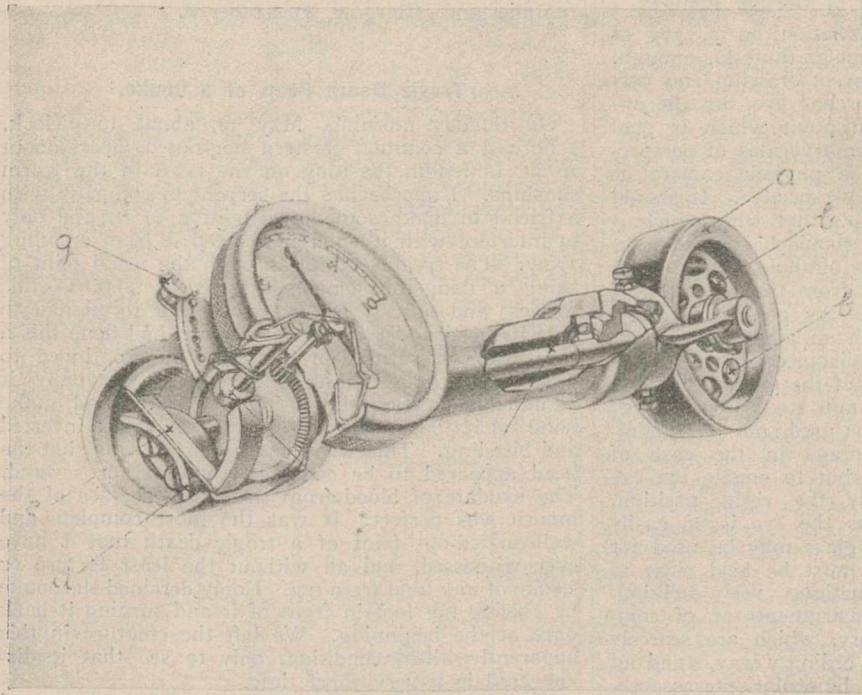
R.A.E. gyro turn indicator Mark V. *a*, gyro wheel; *b, b*, oblique holes for air-drive; *c*, shaft carrying gyro wheel communicating motion to pointer; *d*, cam on shaft *c*; *e*, controlling spring; *f*, cam altering tension of spring *e*, worked by lever *g*.
